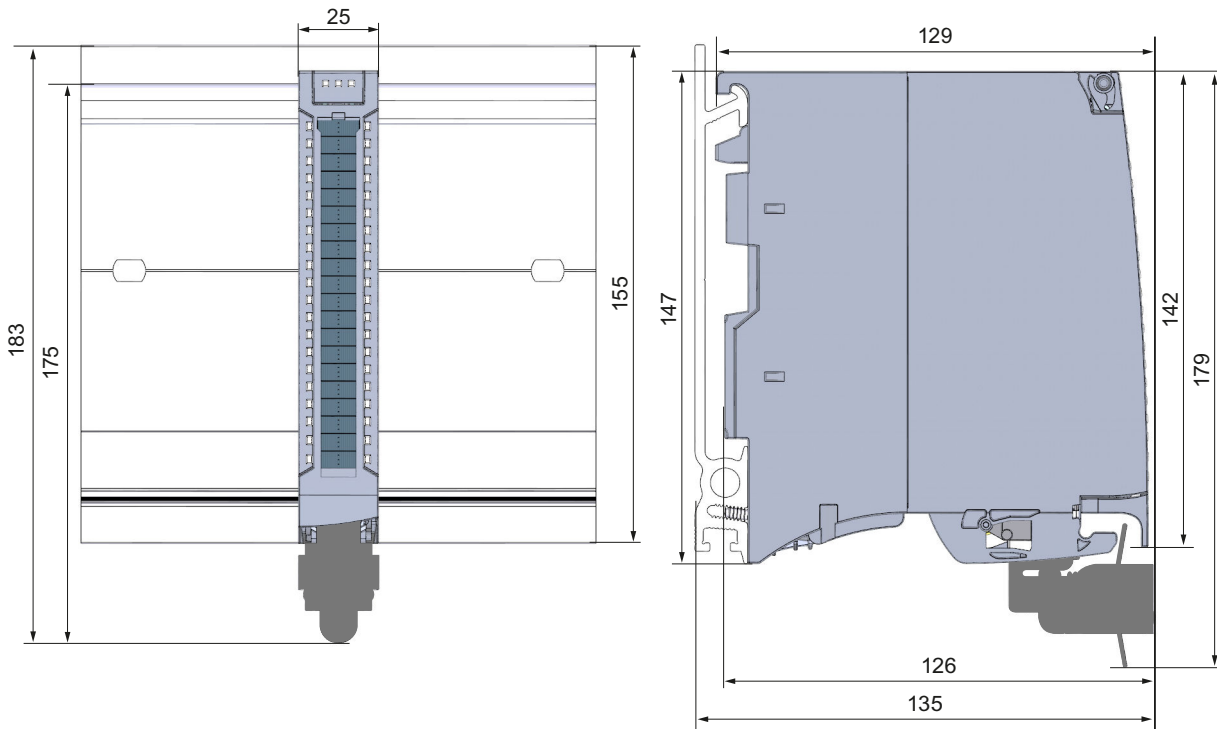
Dimension drawing of the AI 24xCVM HF module
